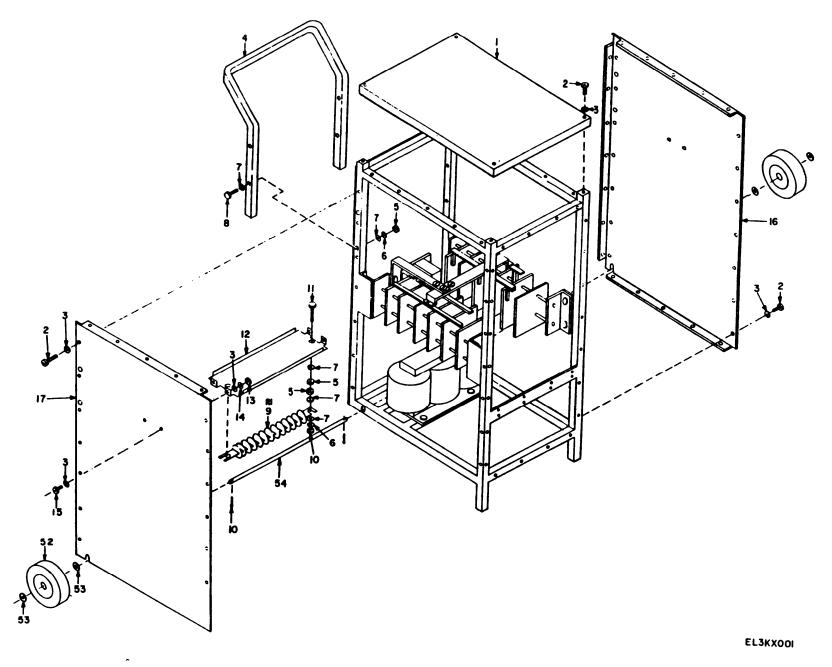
Power Supply PP-4606C/G, Front View (Sheet 1 of 2).
